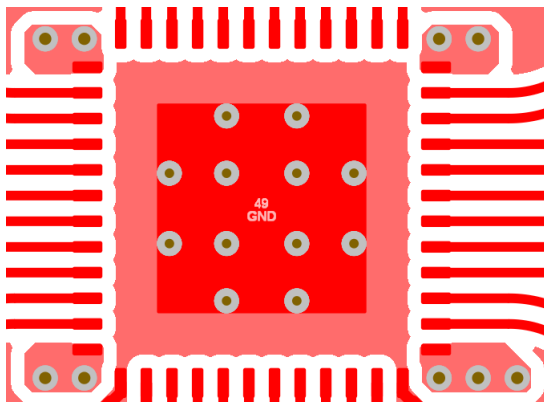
PCB Layout Example for LMK1D2108L, Top Layer
